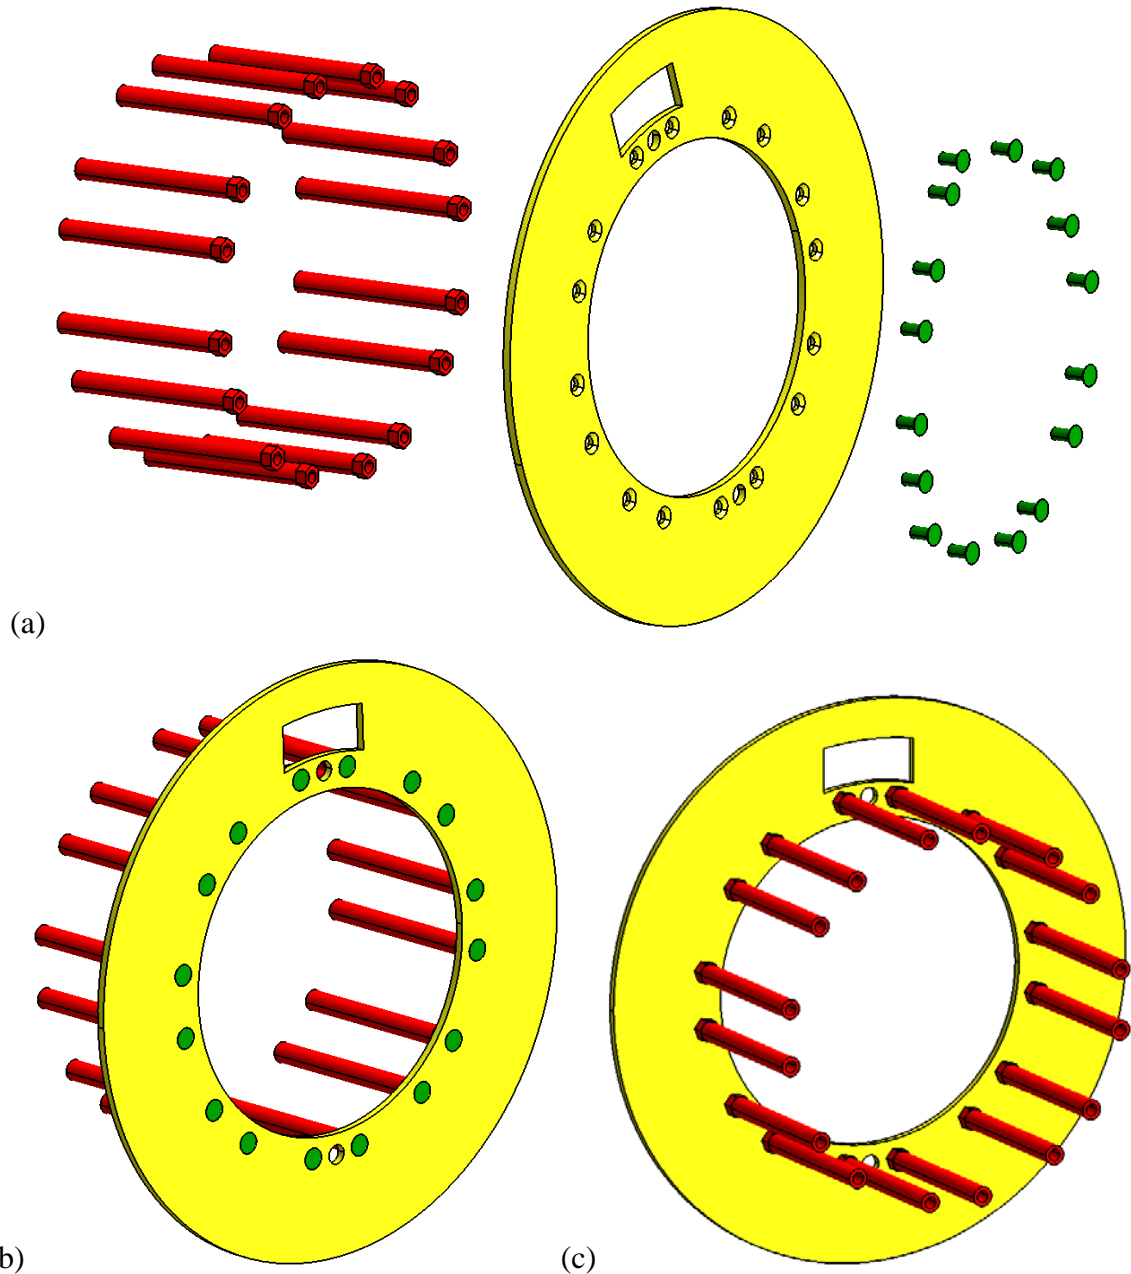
(a) Exploded view of safety shield components; (b) assembled safety shield front view; (c) assembled safety shield rear view.
